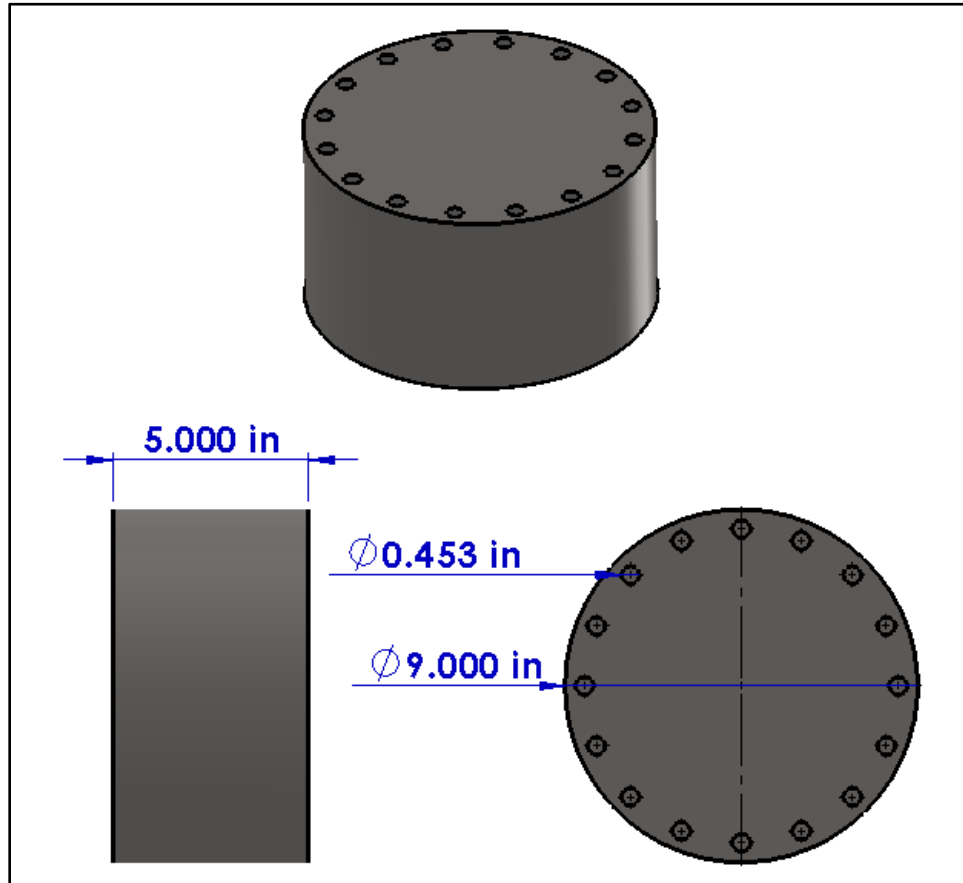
Piezoelectric Shaker Table Base Component Dimensions
